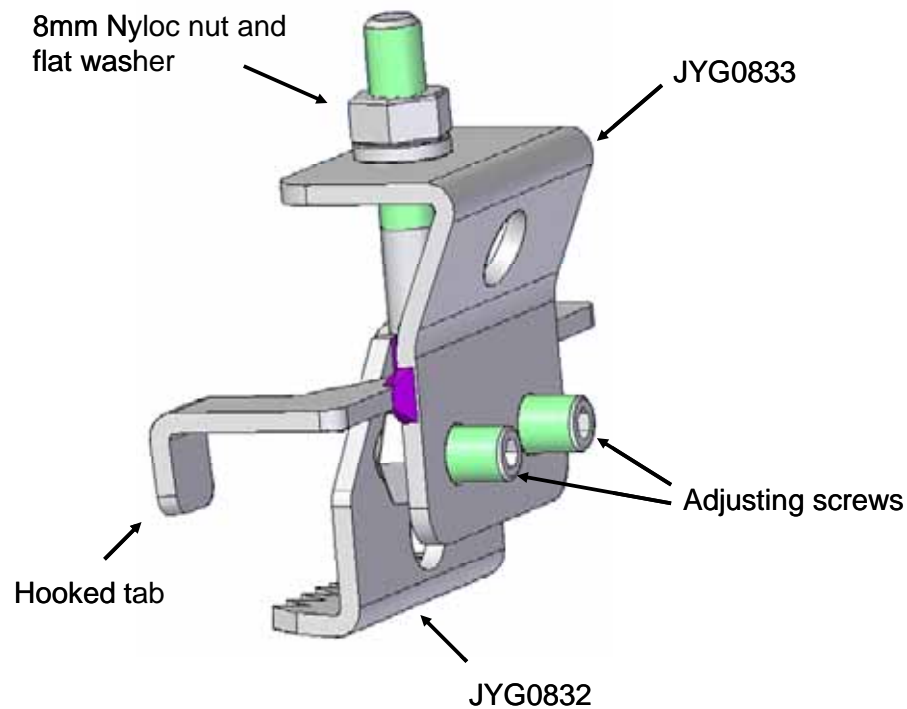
Pod Clamp Assembly – NSN 5340-66-160-6597 / MPN JYG0831
